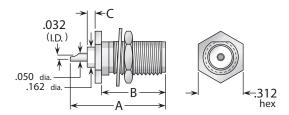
(Rear mount, solder pot contact, no mounting gasket)
